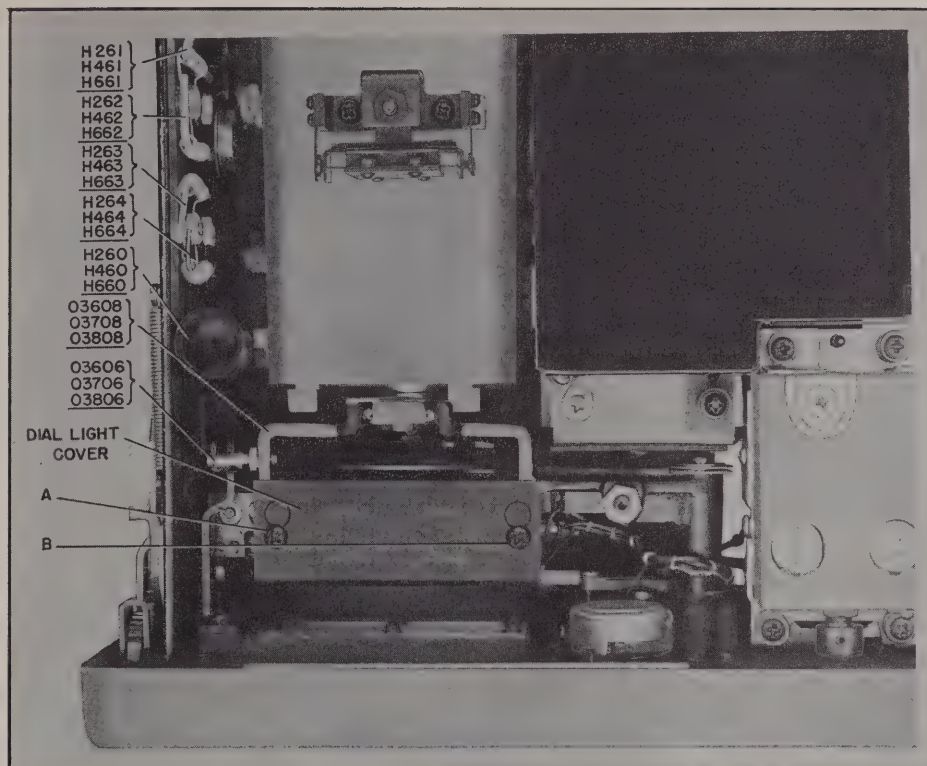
Lens-Arm Assembly and Dial Light Compartment, Top View
